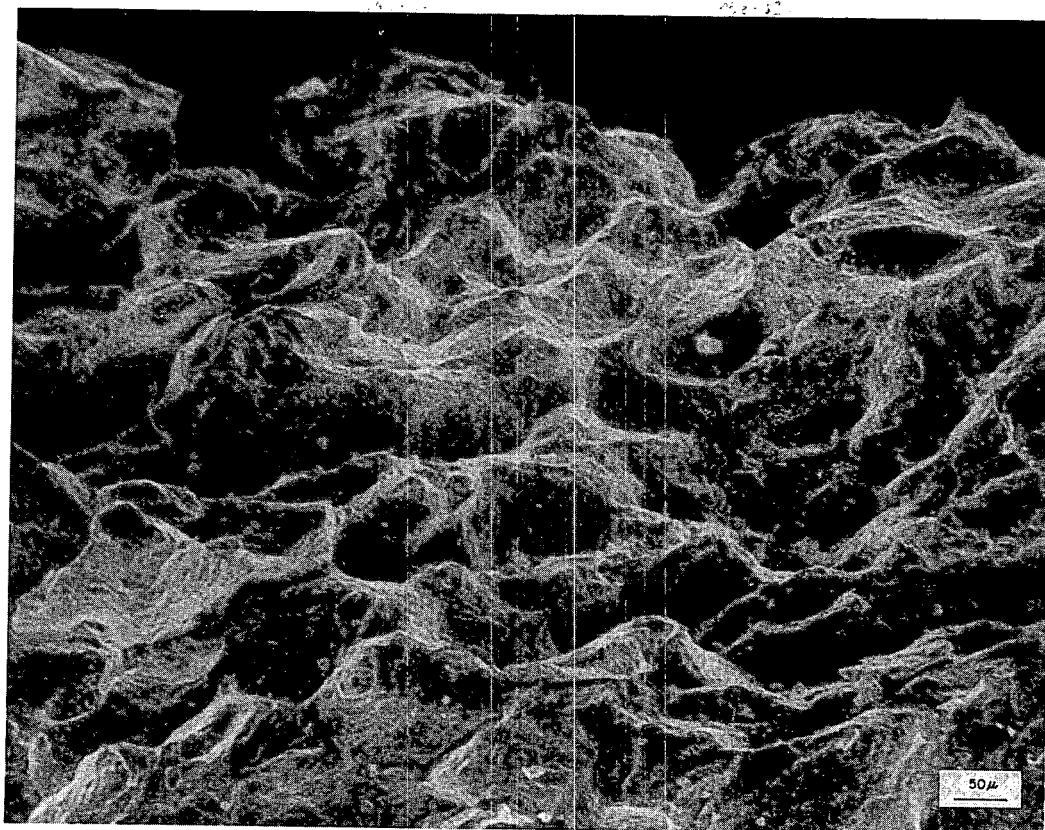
Scanning Electron Fractograph of Service Fracture
